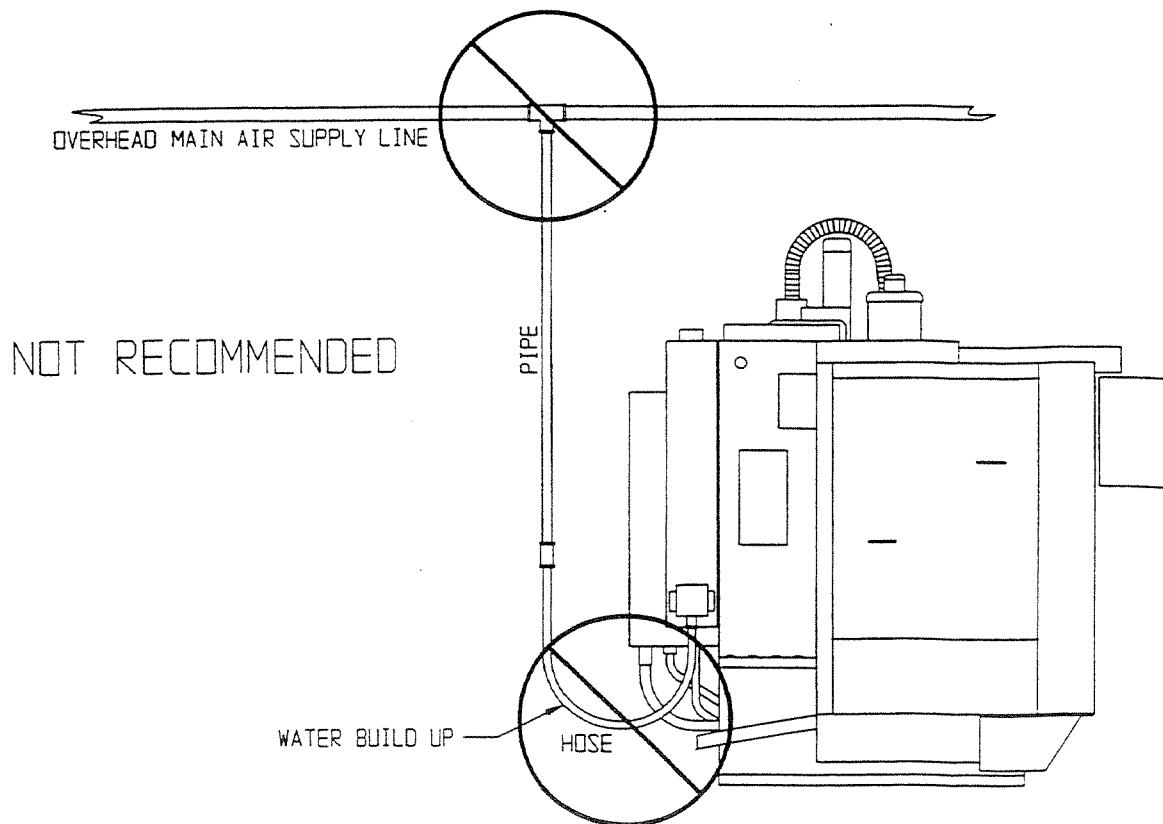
NOT RECOMMENDED - AIR INSTALLATION
